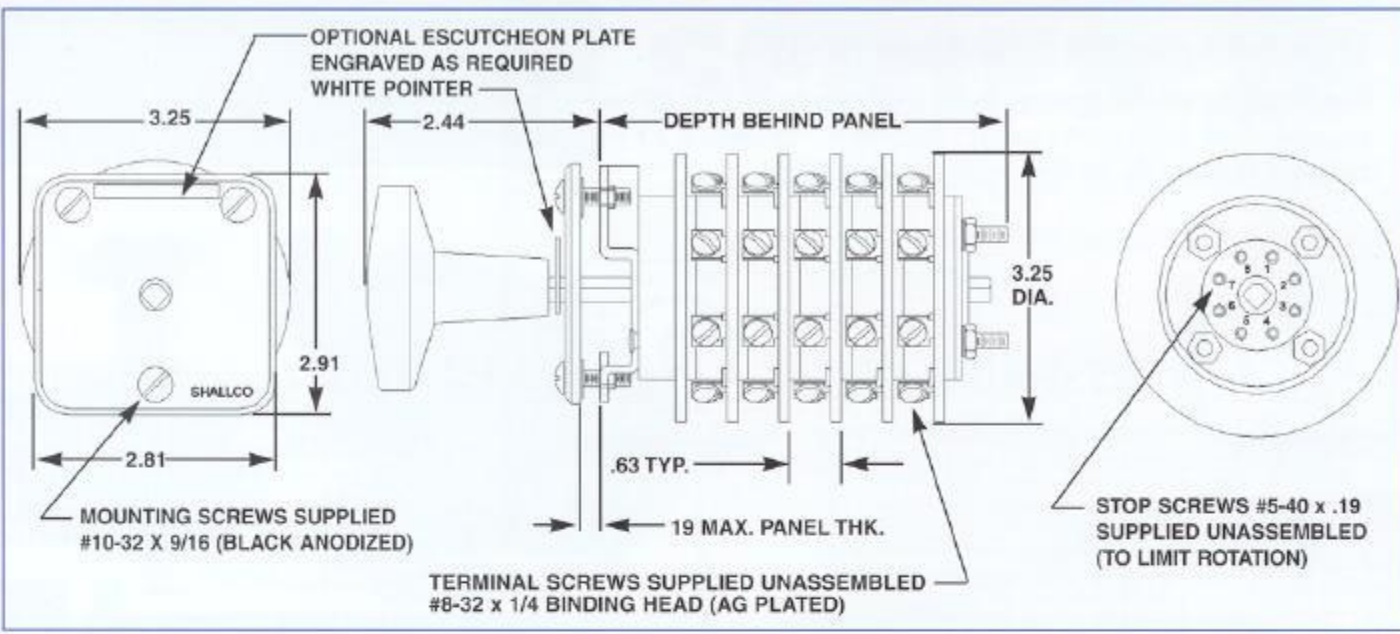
Basic Switch and Escutcheon Plate Dimensions
